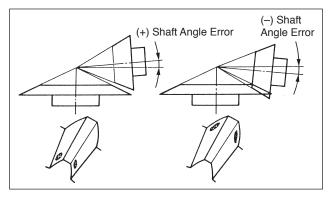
Poor Contact Due to Shaft Angle Error
